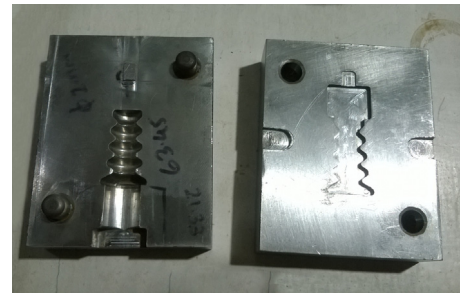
Molds used to manufacture tapered triangular ABFPA of length 27.5 mm.
